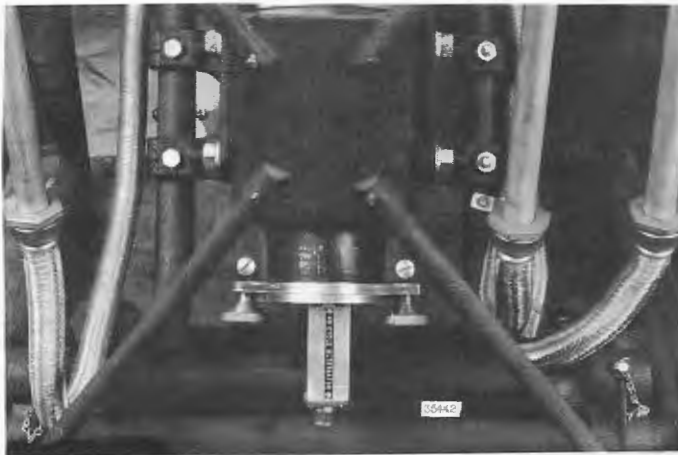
Close-up of the small alternator mounted on the back of the ABI casting of a typical direction-finding equipment
